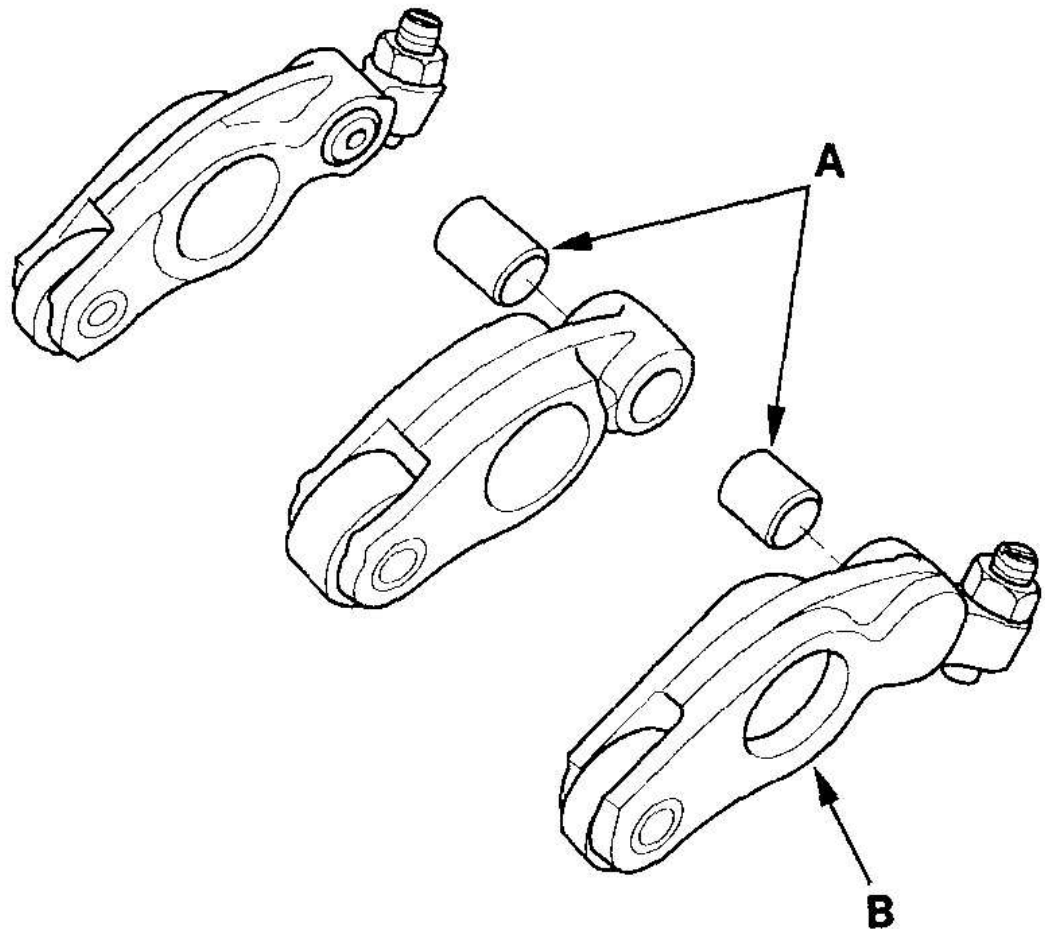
Inspecting Rocker Arm Synchronizing Pistons
